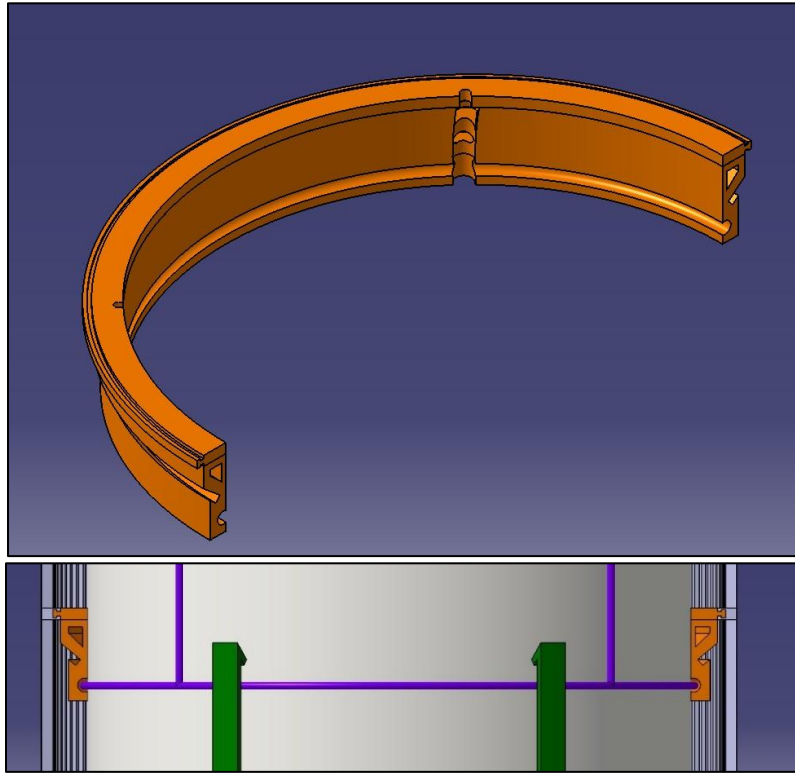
Fuel Tank Mid Ring Fixture (Top) and Mid Ring Fixture in Payload Bay (Bottom)
